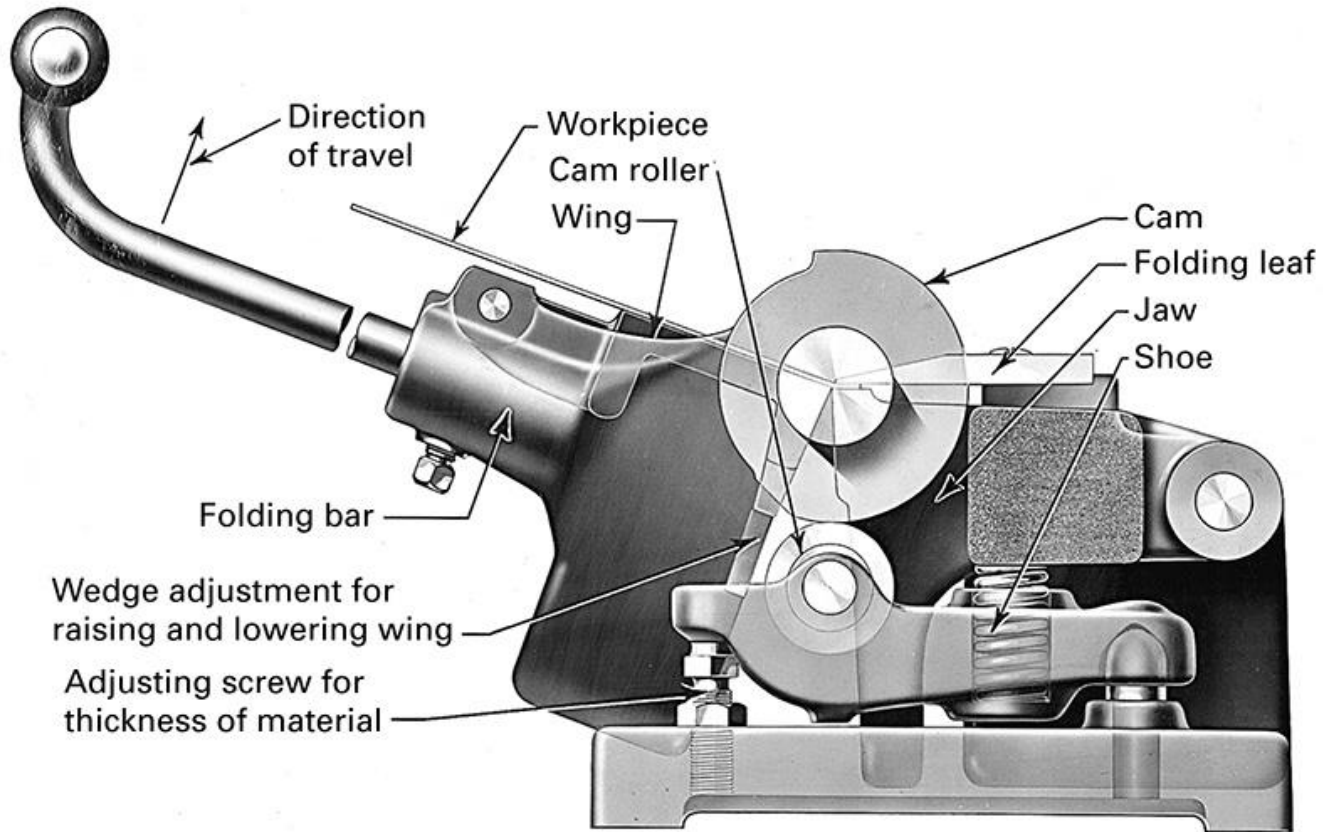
Phantom section of a bar folder, showing position and operation of internal components. (Courtesy of Niagara Machine and Tool Works, Buffalo, N.Y.)
